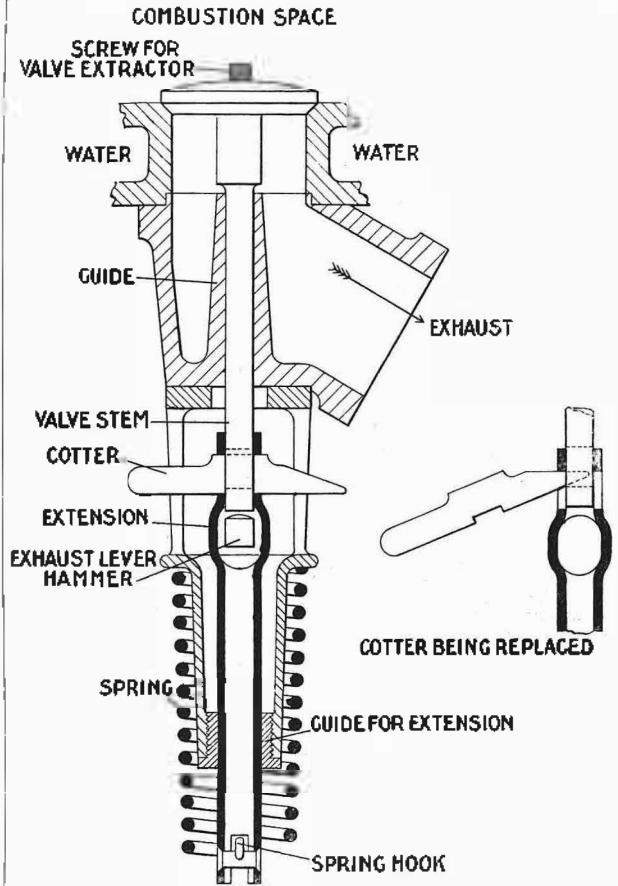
Section of exhaust valve showing the new spring attachment.
